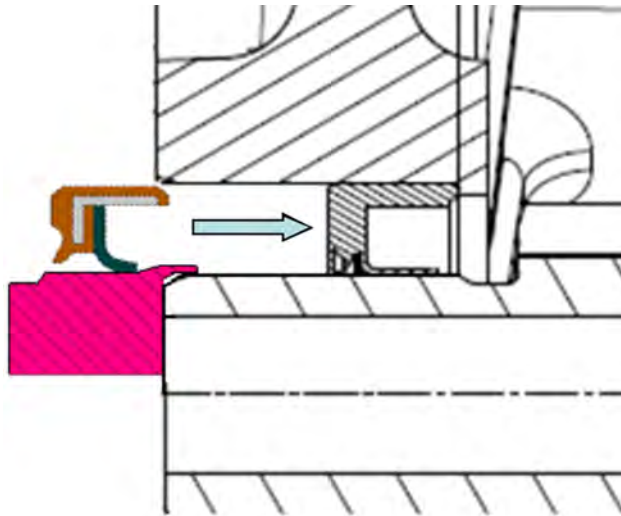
Using a mounting pin to fit the seal on to the crankshaft
